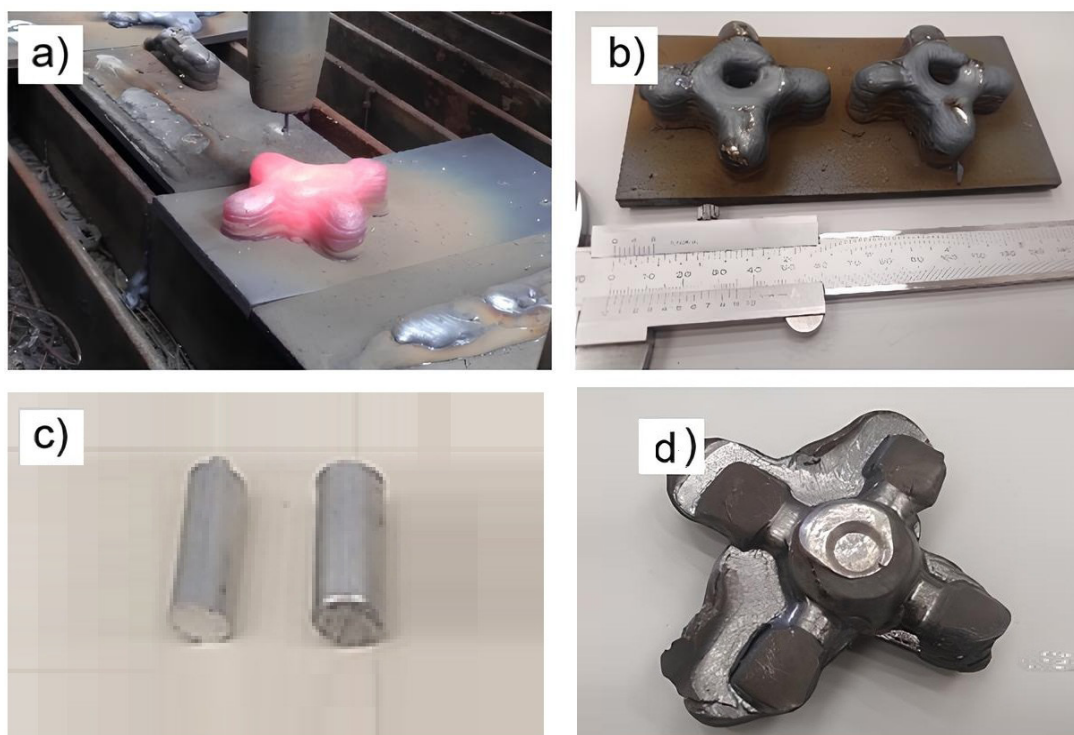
a) External part of the crosshead on the welding machine; b) printed samples; c) 3/8" rolled aluminum bar d) forged bimetallic crosshead.
